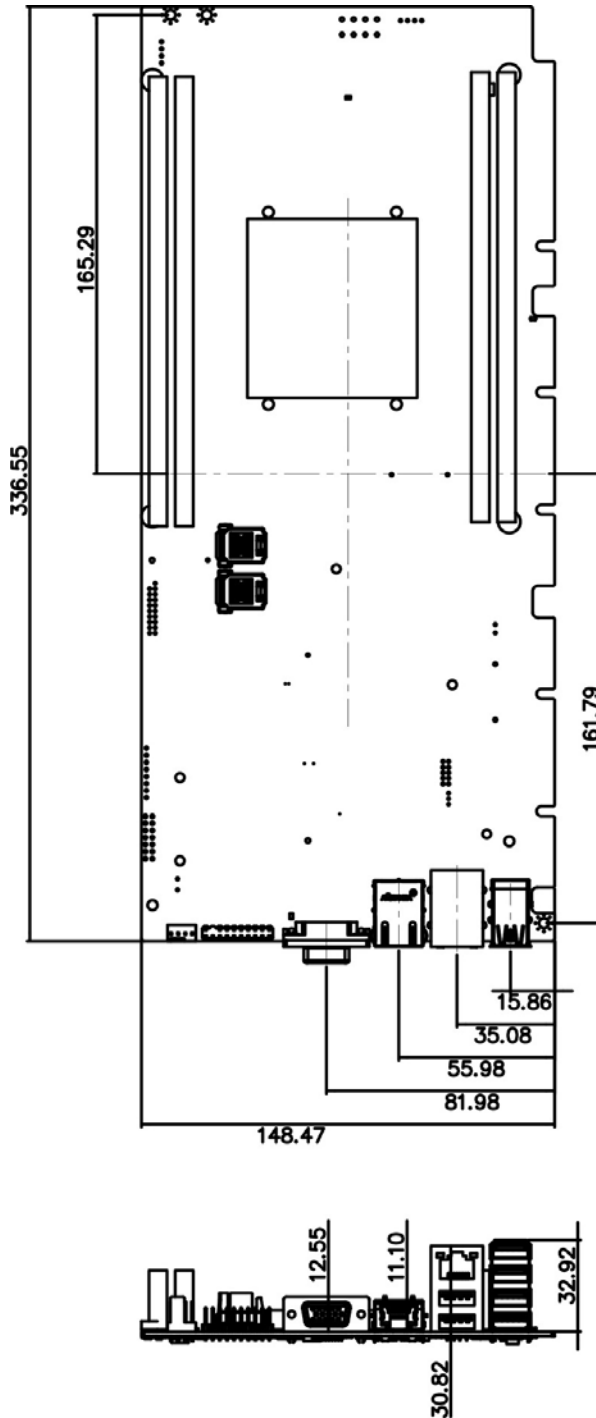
PEMUX-XEW1 Dimensions (mm)
